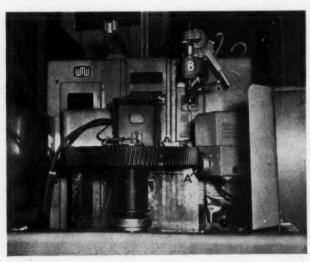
Type IHU500 Induction Hardening Machine for Gears and Shafts. The Large Gear-wheel Seen in Position is Hardened by the Indexing Method
